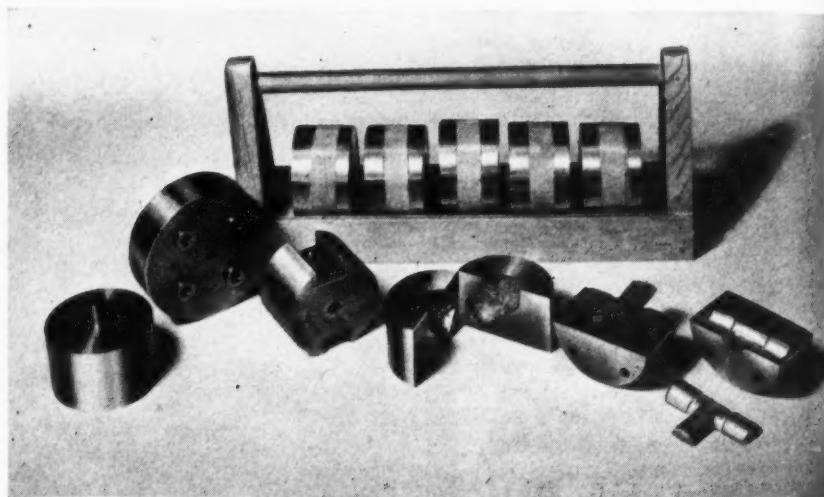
Kirksite Jaws can be Cast around Unusual-shaped Pieces for Machining. At Lower Right are Jaws for Holding Hydraulic Fittings
